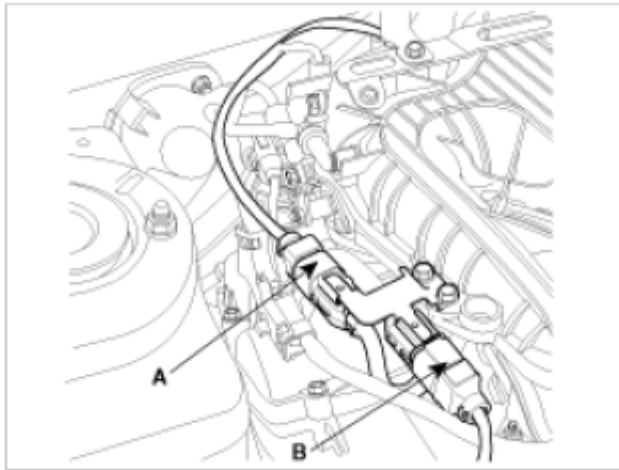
Identifying RH Front And Rear Oxygen Sensor Connectors
